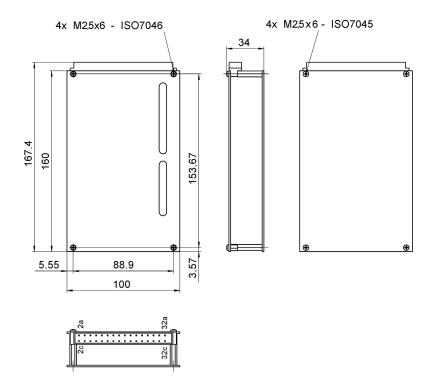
E-610.00, E-610.S0 and E-610.L0 dimensions in millimeters
